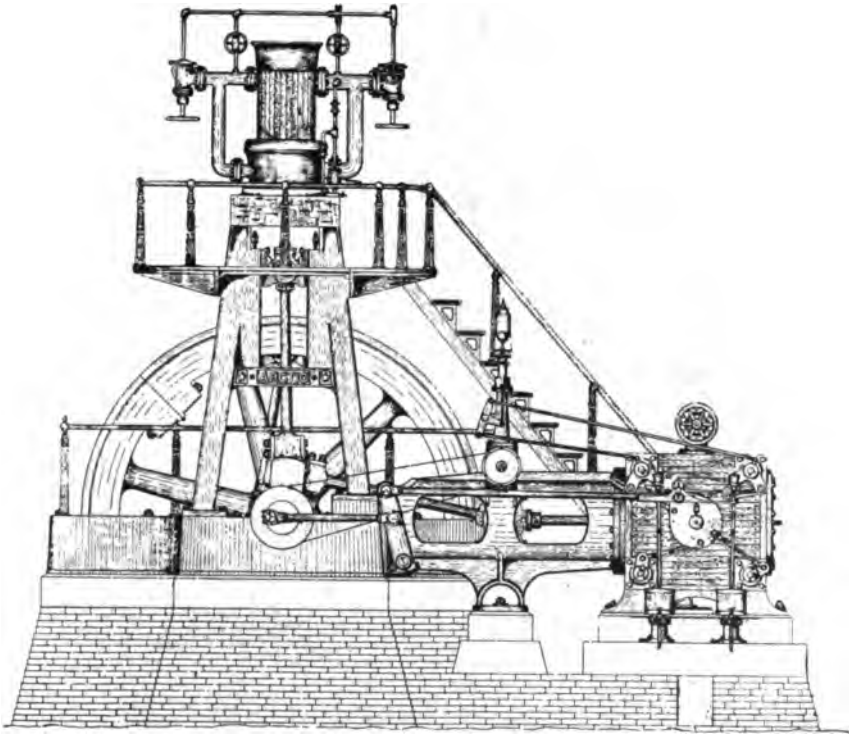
SECTION ARCTIC AMERICAN MACHINE AS BUILT IN 1900.
